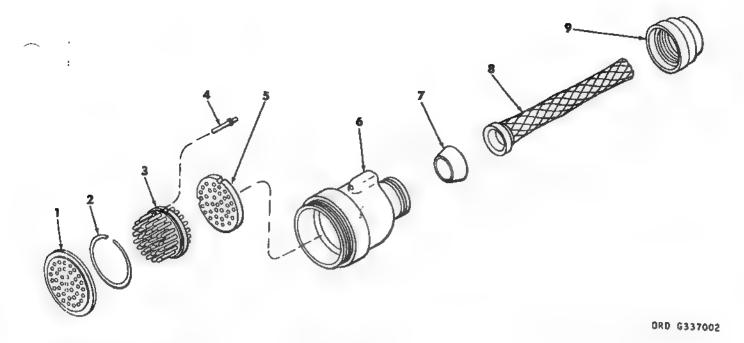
CABLE ASSEMBLY, PUMER, ELECTRICAL /11067500 AND 11067544/ /SEE FIGURES 12 AND 15 FOR MEXT HIGHER ASSEMBLY/
